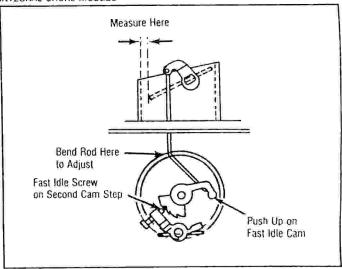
Fast Idle Cam Adjustment (Integral Choke Models)
